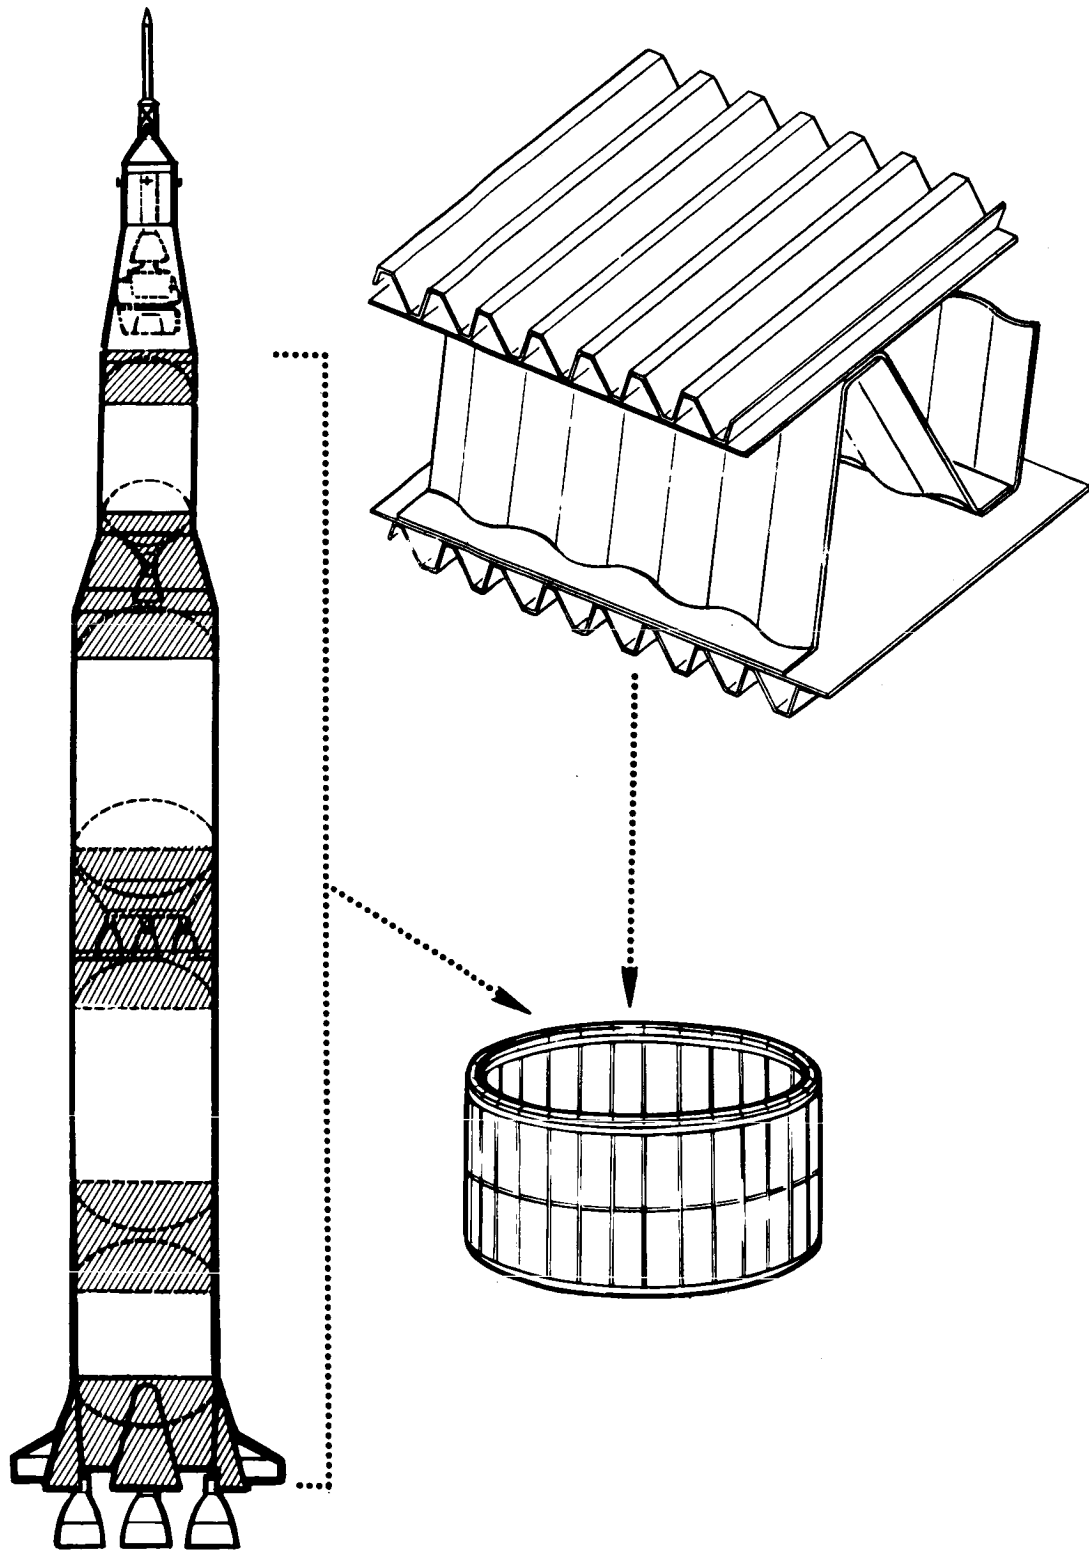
Selected Concept - Double Wall Truss Core Semisandwich
